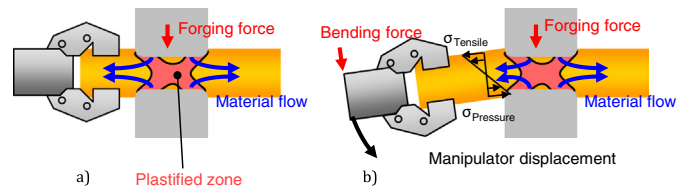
(a) Conventional open-die forging and (b) open-die forging with superimposed manipulator displacements.
